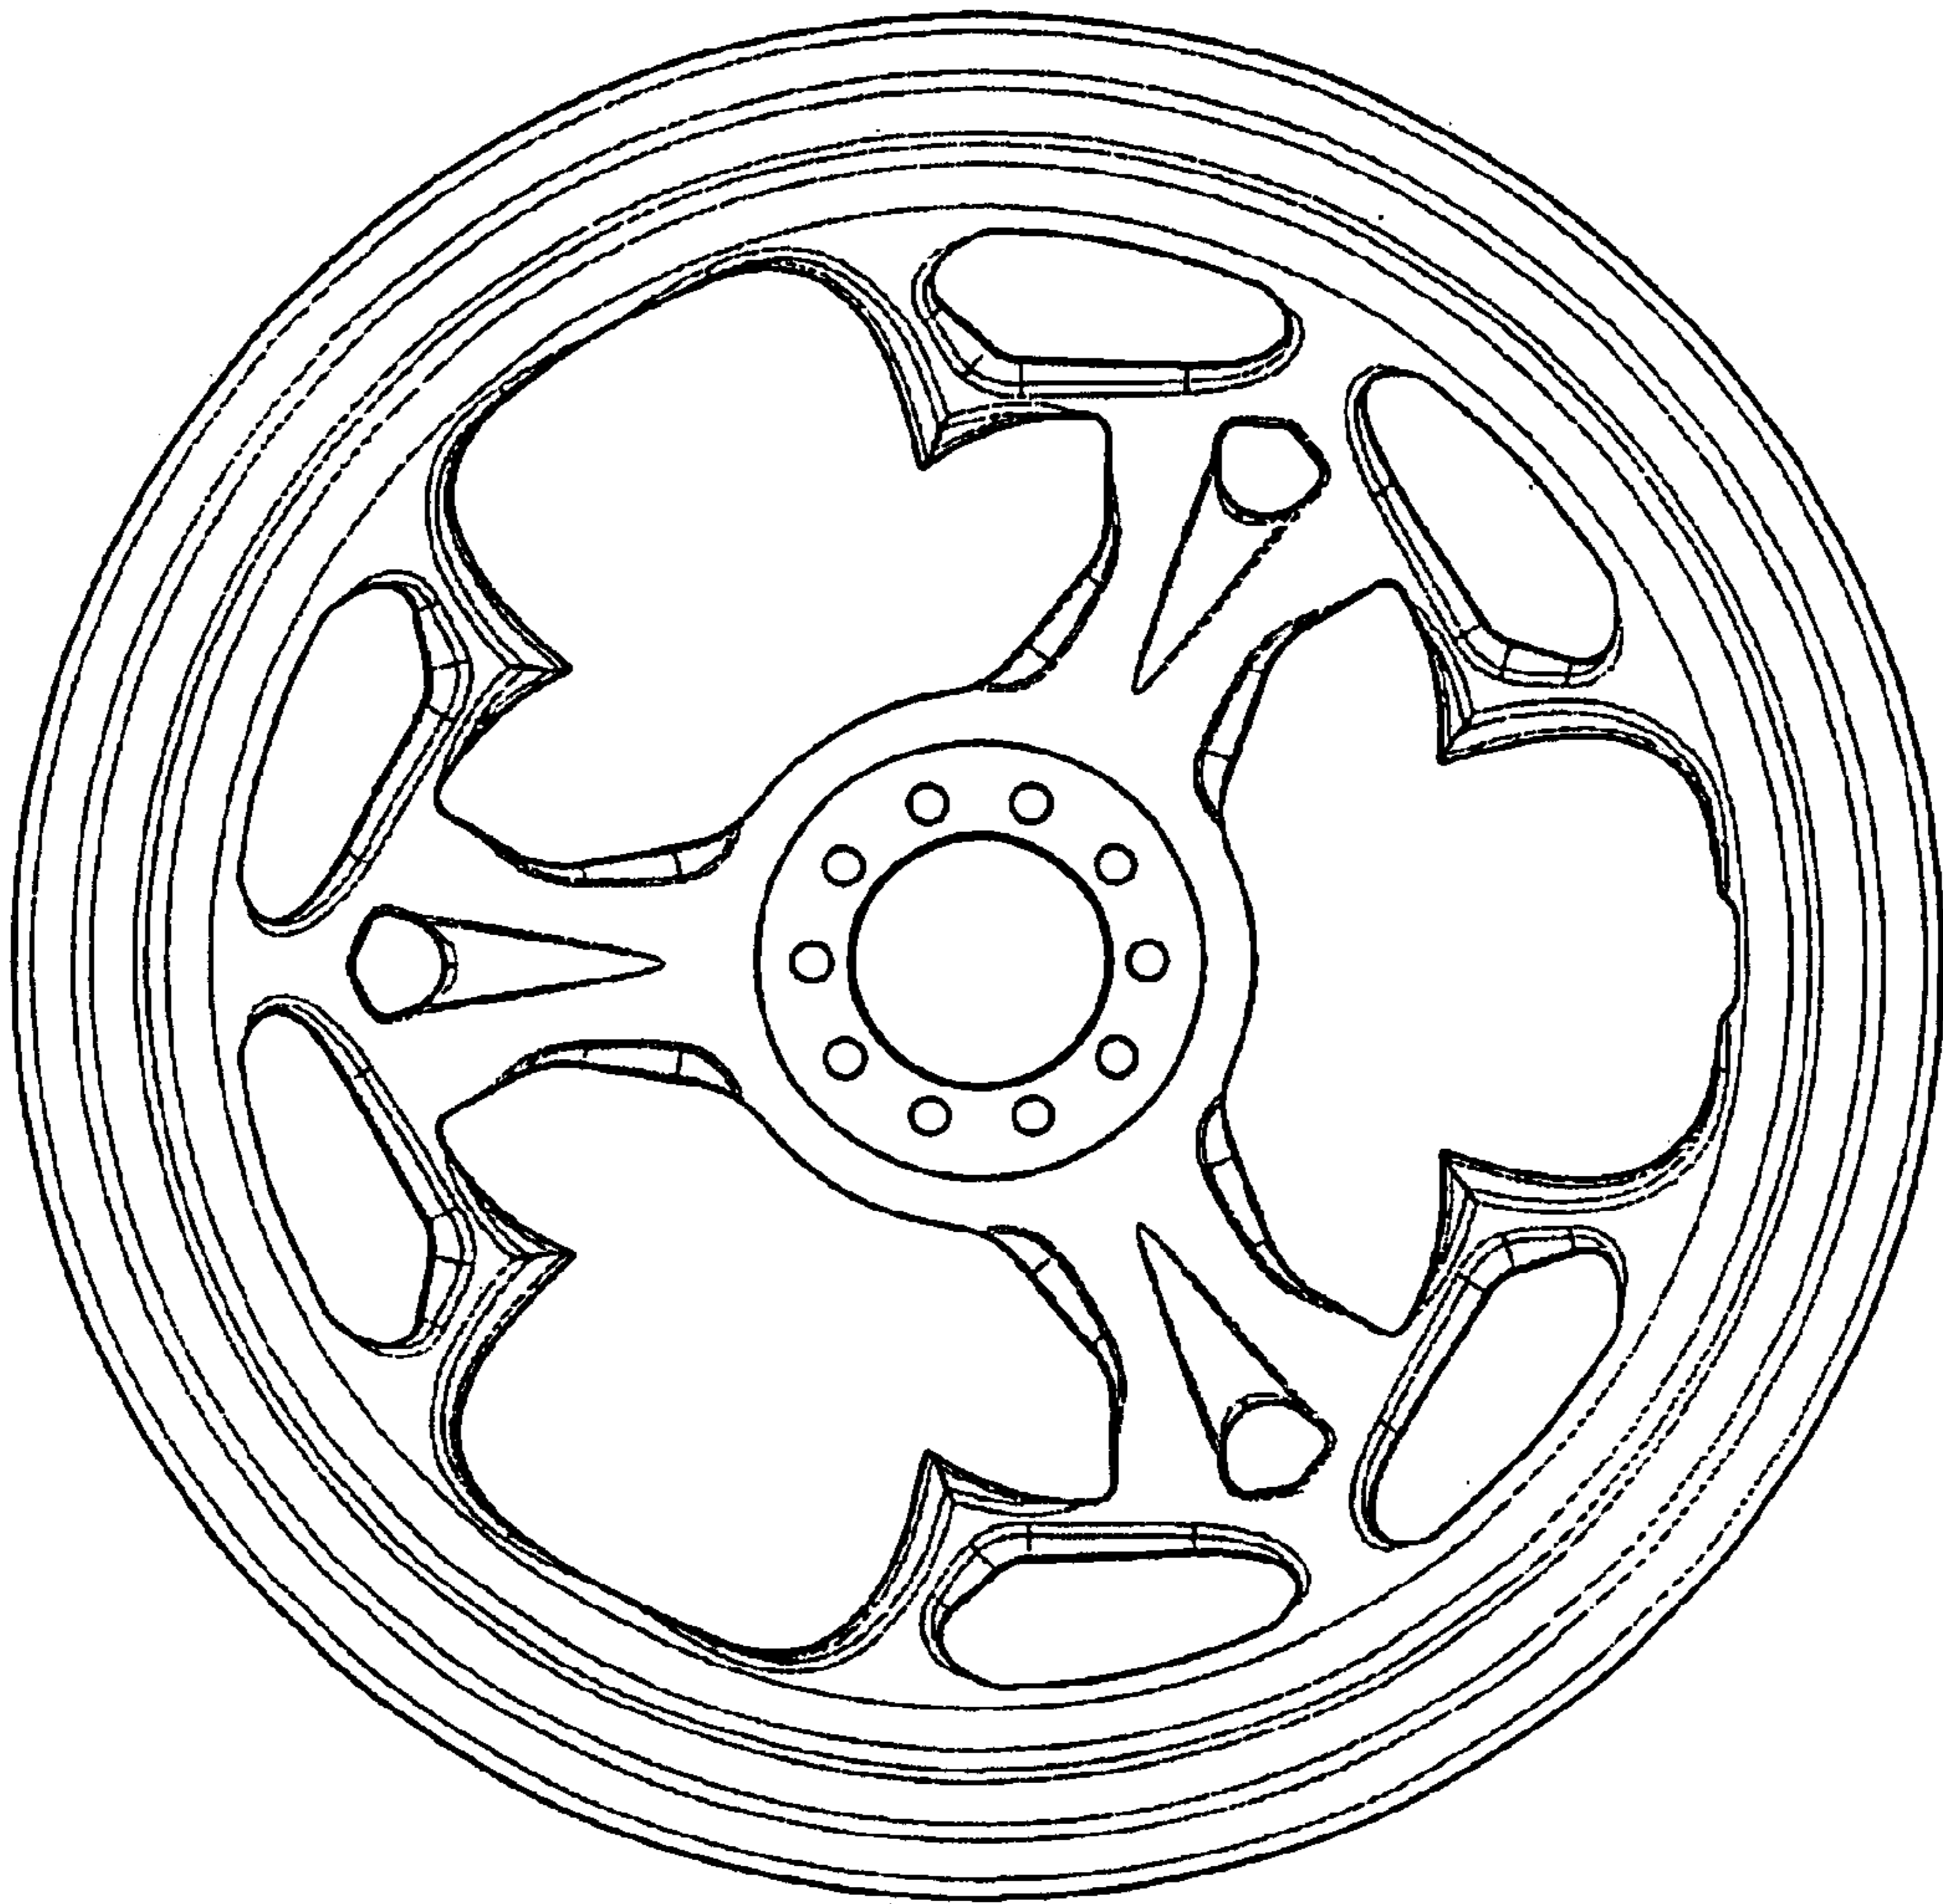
is a top view of the wheel shown in FIG. 4, the bottom view, left side view and right side view are identical to the top view; and,
